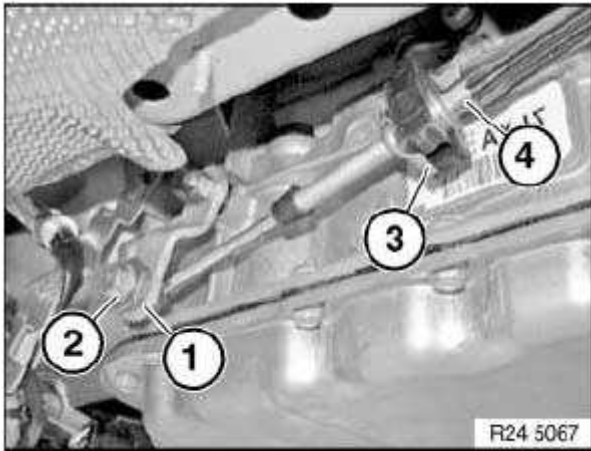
Clamping Sleeve, Nut, Retainer And Cable
